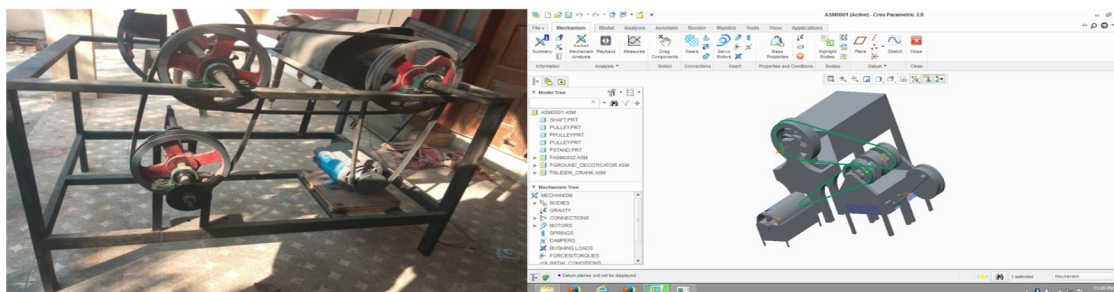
Assembly Of Multioperation Agriculture Machine
